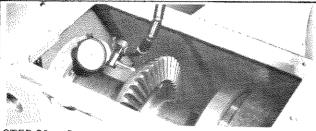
REASSEMBLY AND INSTALLATION OF BEVEL GEAR SHAFT ASSEMBLY (Sheet 3 of 4)
